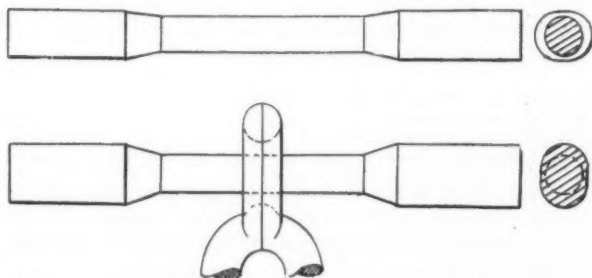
A Link Blank Ready to Be Placed in the Press.
